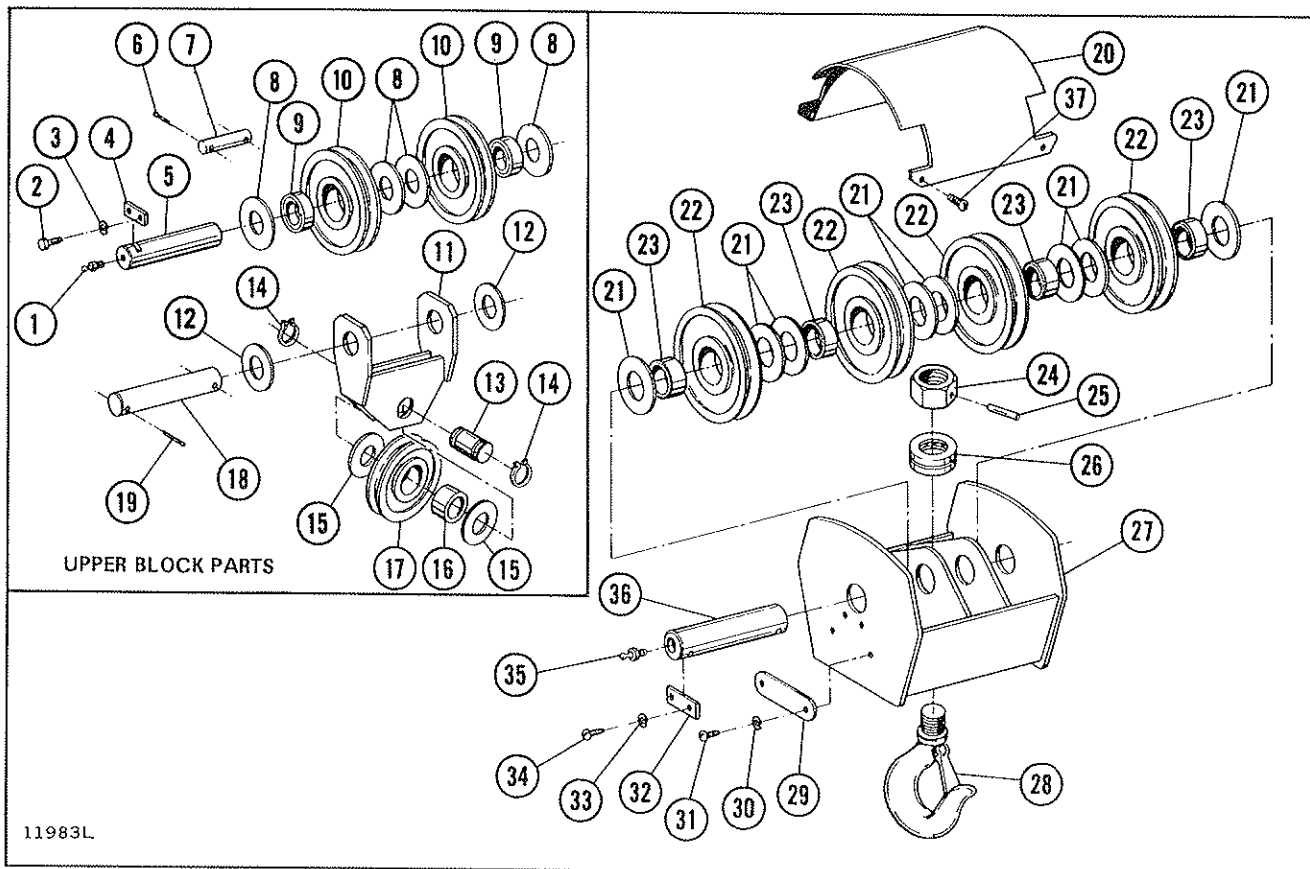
Upper and Lower Block Parts Including Hoist Rope.
